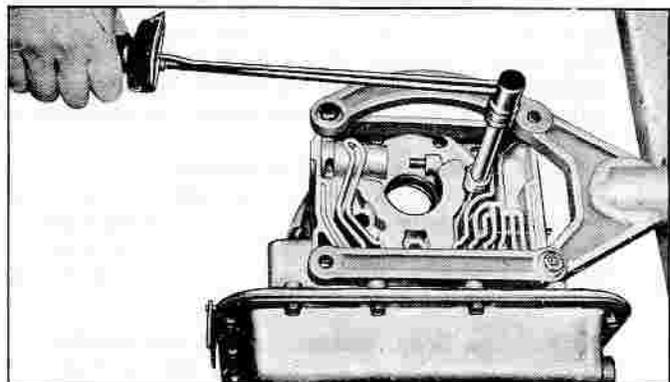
E-50—Measuring Rear Pump and Reverse Piston Bolt Torque
